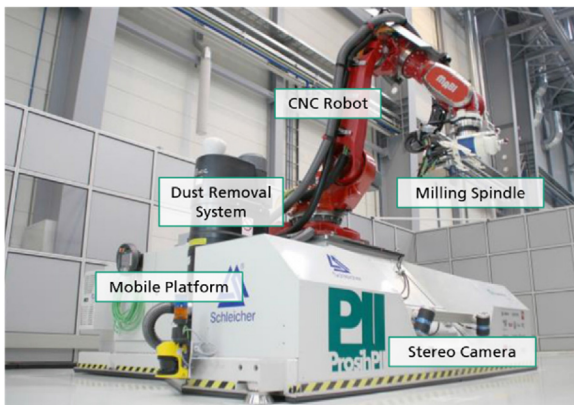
Mobile milling robot: machining of large aerospace structures [72].
